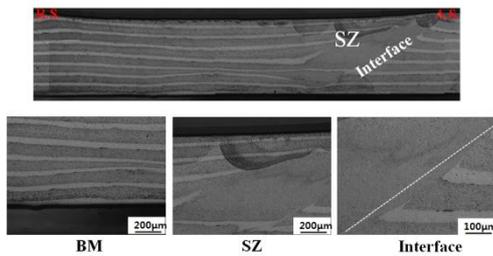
macro and OM images of Friction stir welds about ARBed sheets
